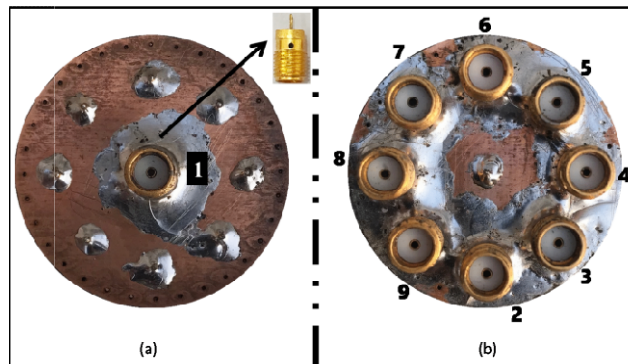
Fabricated power divider (a) Top view and machined SMA connector (inset), (b) Bottom view
